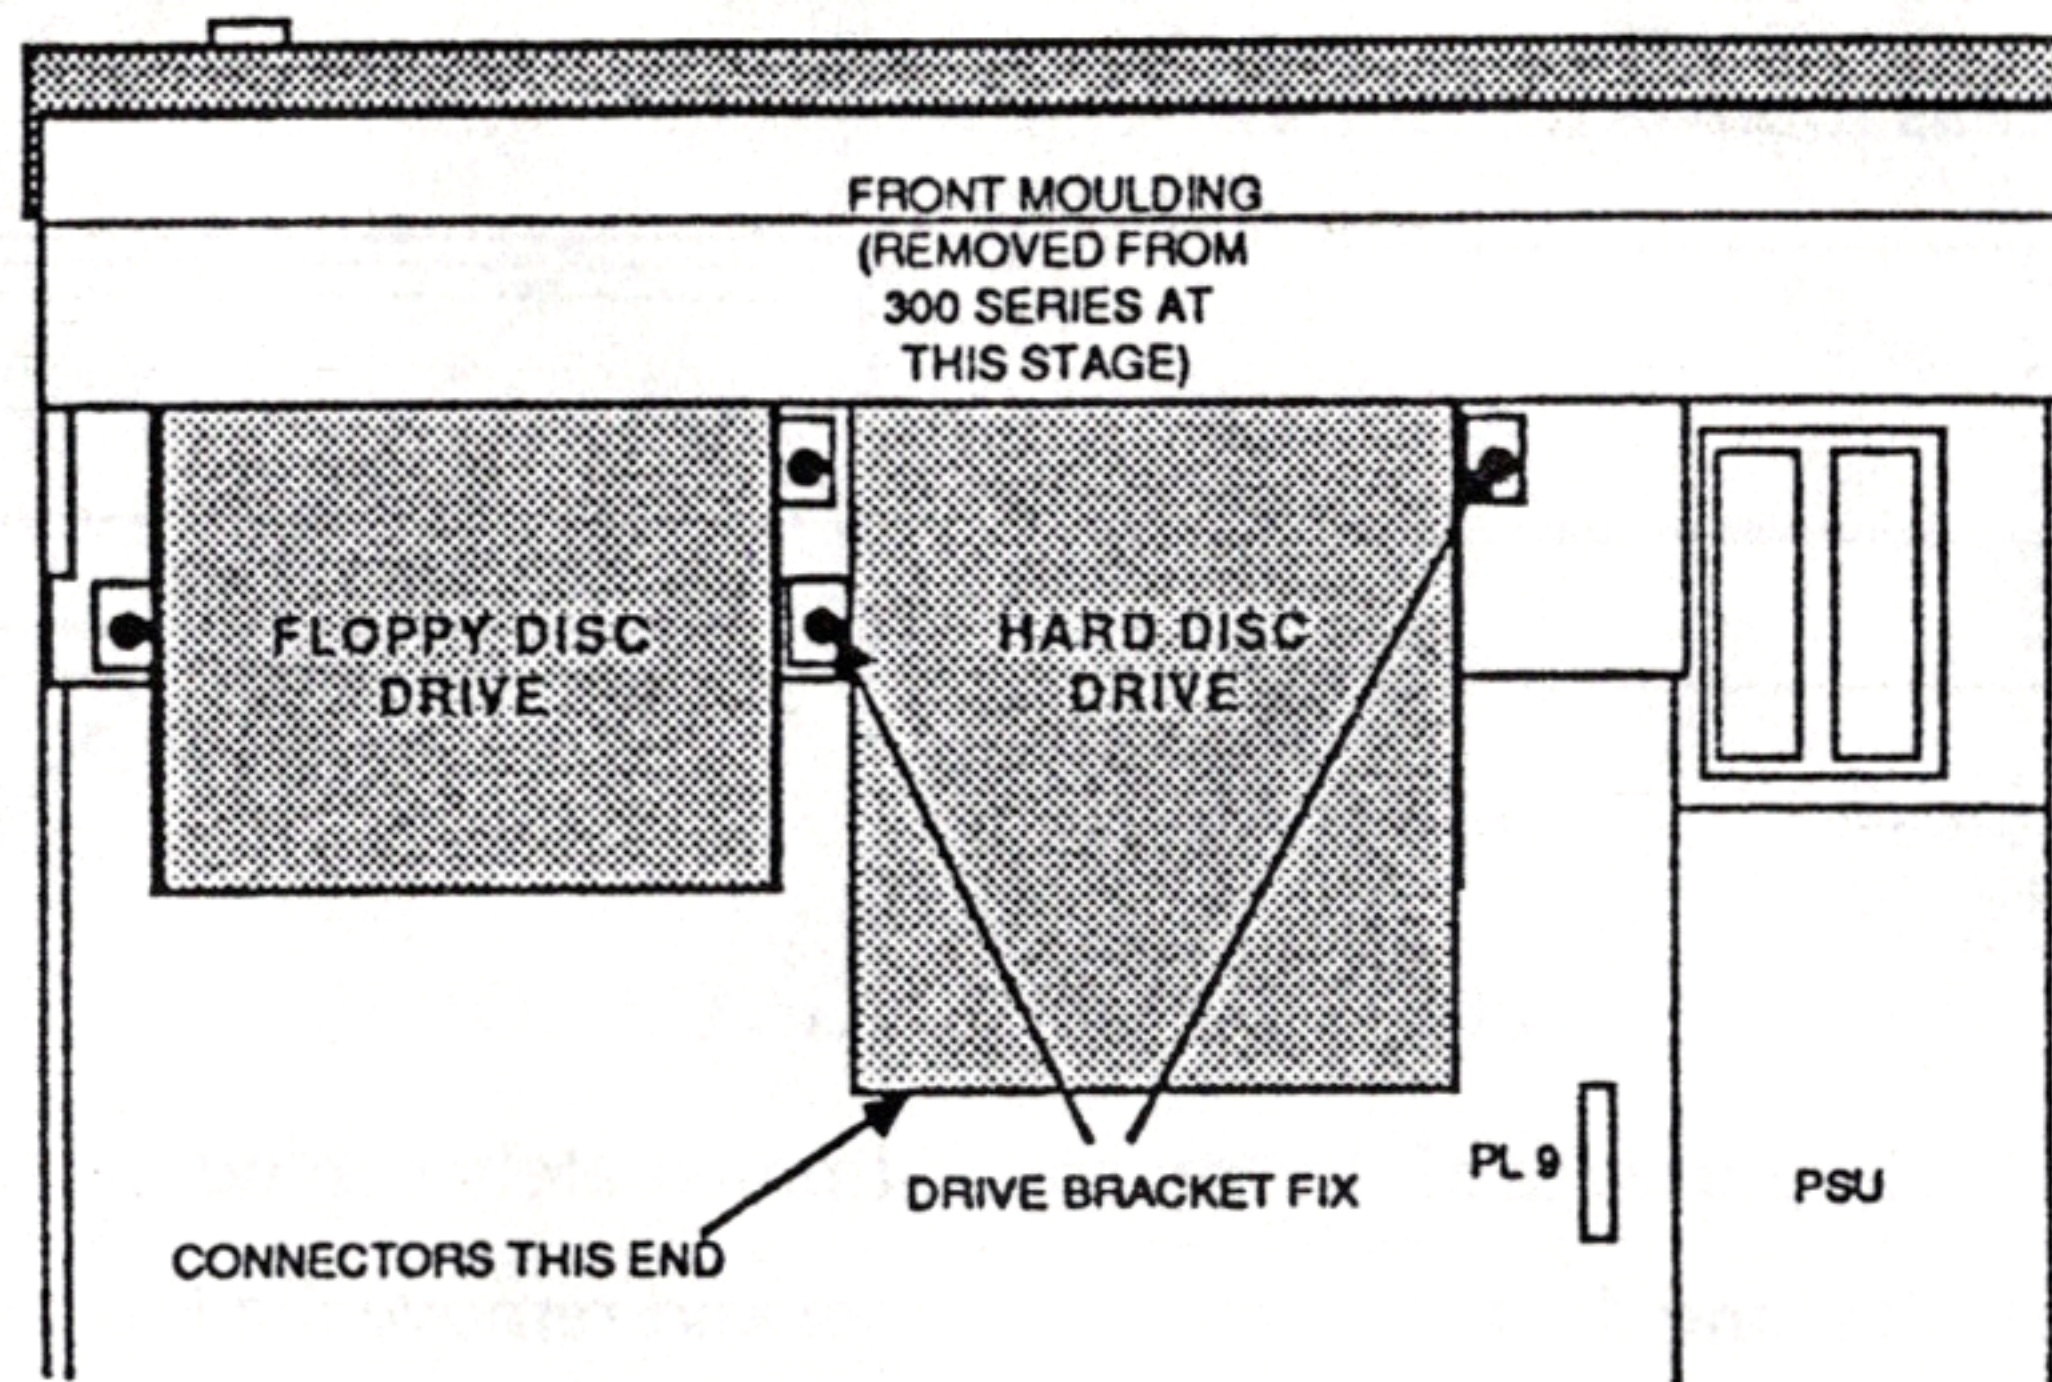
REMOVING FRONT MOULDING ASSEMBLY
